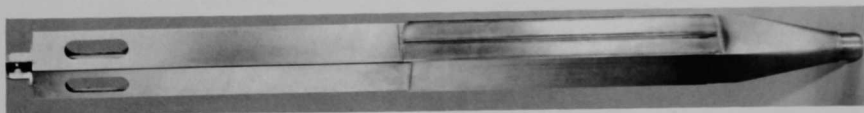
Plate Assembly No. 452-IB-2 with End Fittings Attached
